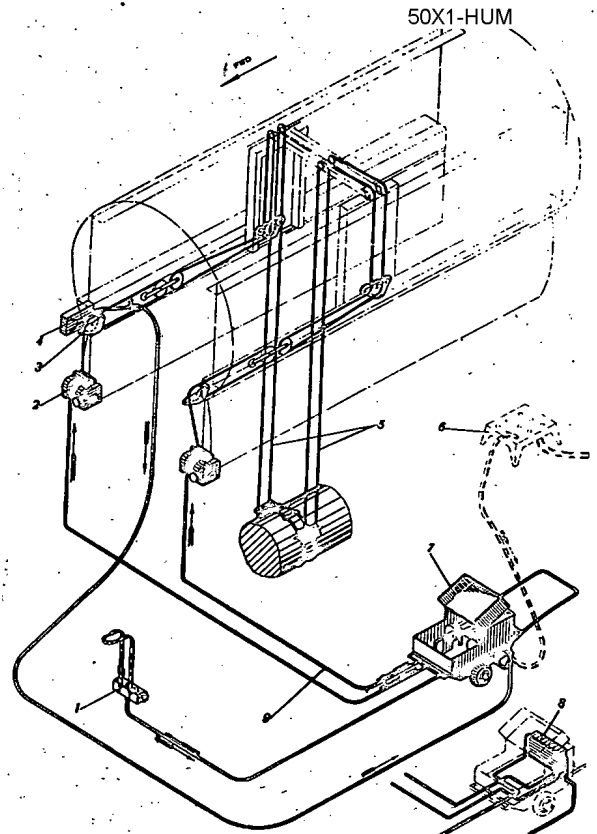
LAYOUT OF B/J-473M HOIST SYSTEM UNITS AND POWER SUPPLY CONNECTIONS
